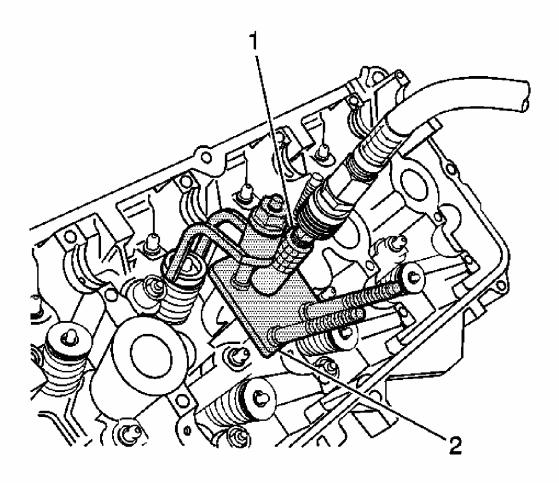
View Of Base Plate Installed Over The Spark Plug Hole For Changing Valve Stem Seal Courtesy of GENERAL MOTORS CORP.
